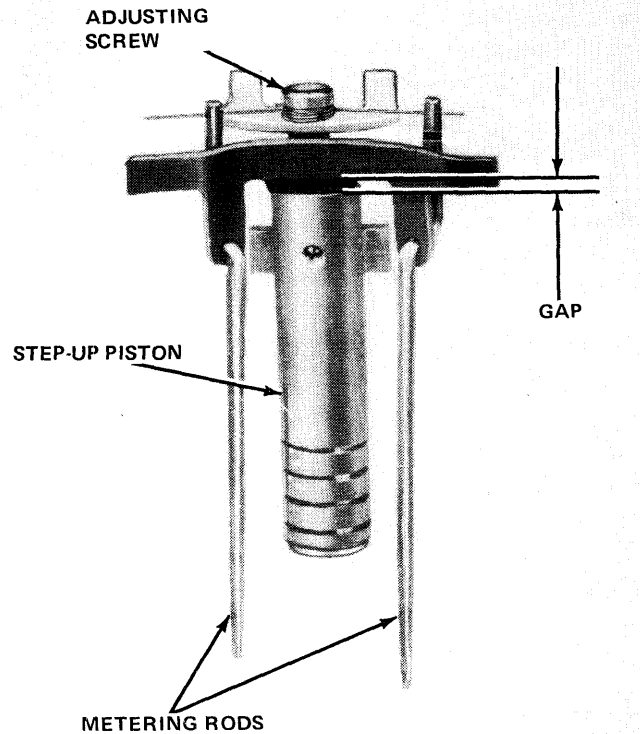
Vacuum Piston and Metering Rod Assembly
